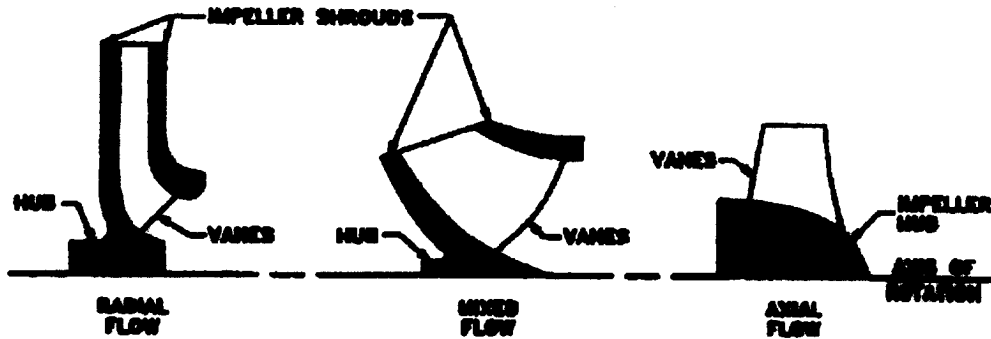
Hydraulic Geometry of Centrifugal Pump Impellers
